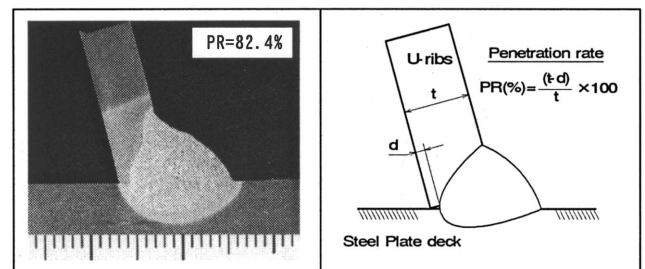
Cross section of fillet weld and penetration rate
